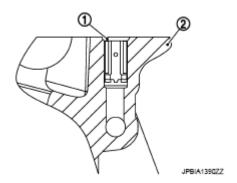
Identifying Timing Chain Tensioner With Stopper Pin Courtesy of NISSAN MOTOR CO., U.S.A.
